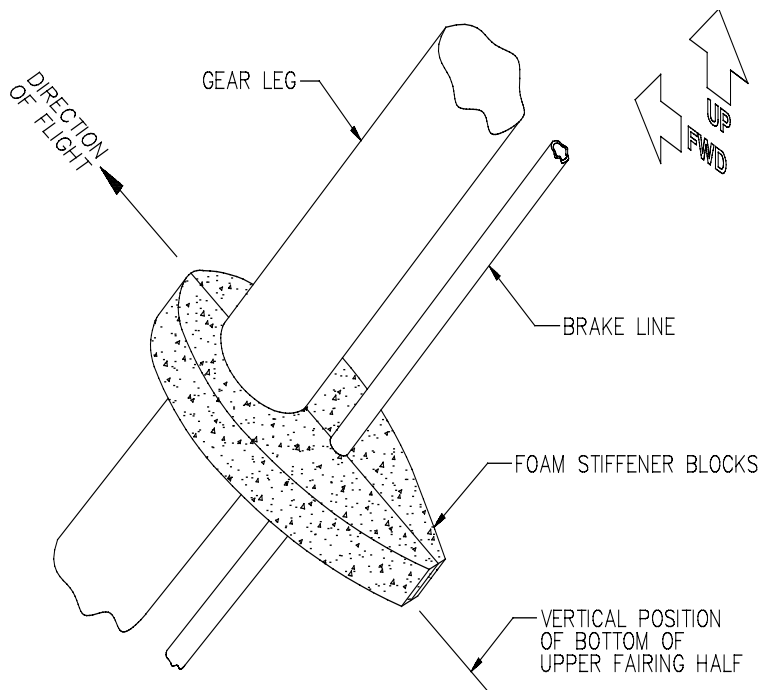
Gluing the Stiffener Blocks to the Gear Leg
